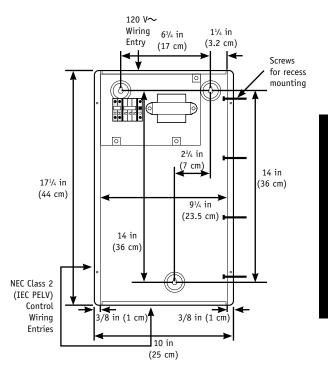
Dimensions and Mounting (HWI-LV17-120)
